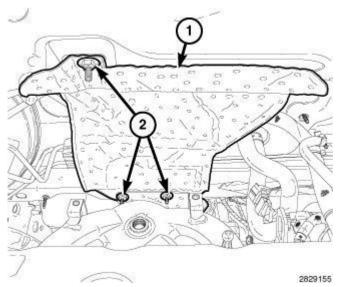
Dash Panel Heatshield & Nuts Courtesy of CHRYSLER GROUP, LLC
